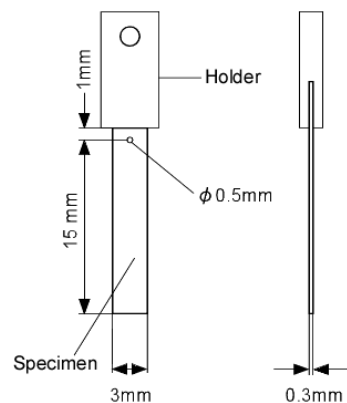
Shape and dimensions of fatigue test specimen of magnesium single crystal.
